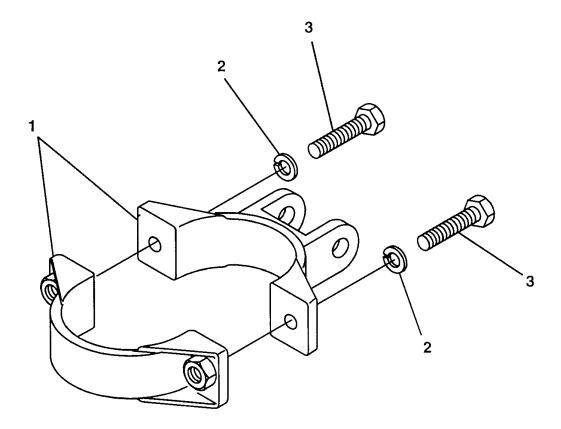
Bracket Assembly, Travel Lock 5830063.
